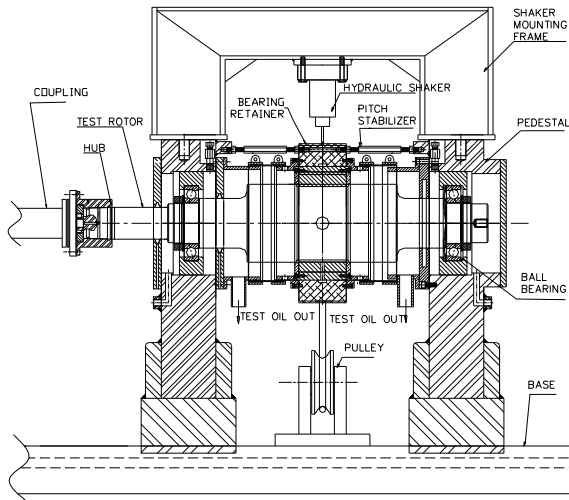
Cross sectional view of test stand (Al-Ghasem and Childs)
